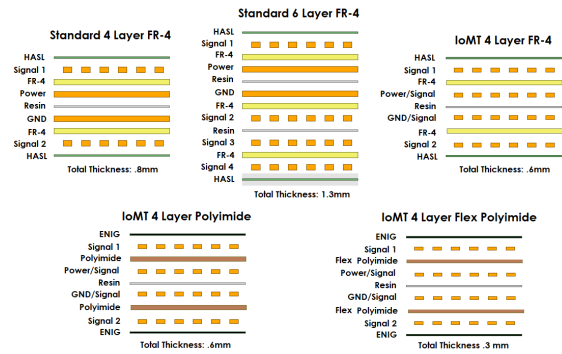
Standard FR-4 vs. IoMT prototype, standard and flex PCB Layer Stackups.
